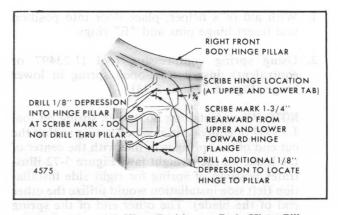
Locating Hinge Position on Body Hinge Pillar - "X" Styles
